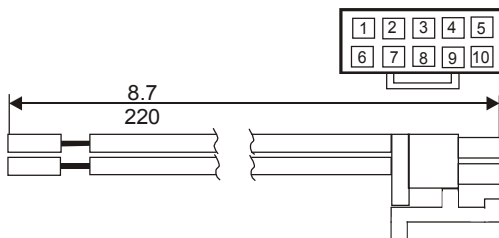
10-Pin Molex Connector Wire Lead, in. (mm)
